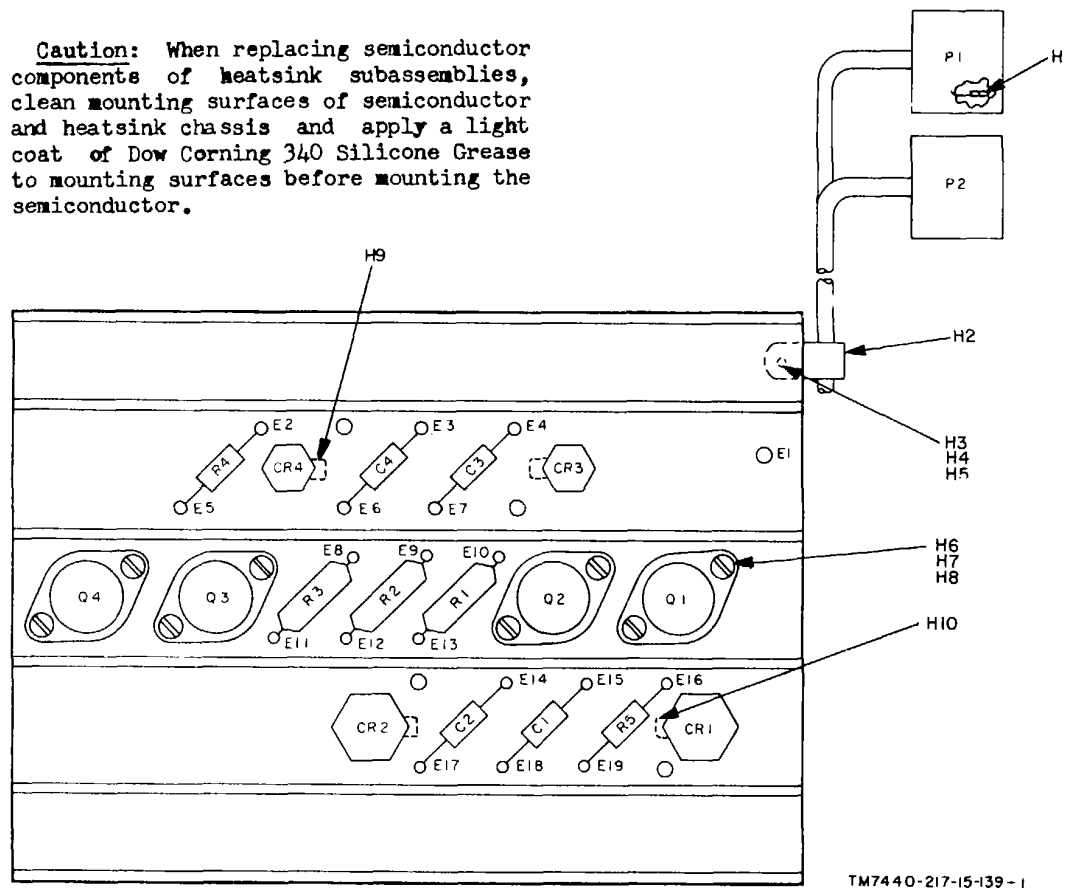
Heatsink components assembly (PS1A4), components location diagram.
